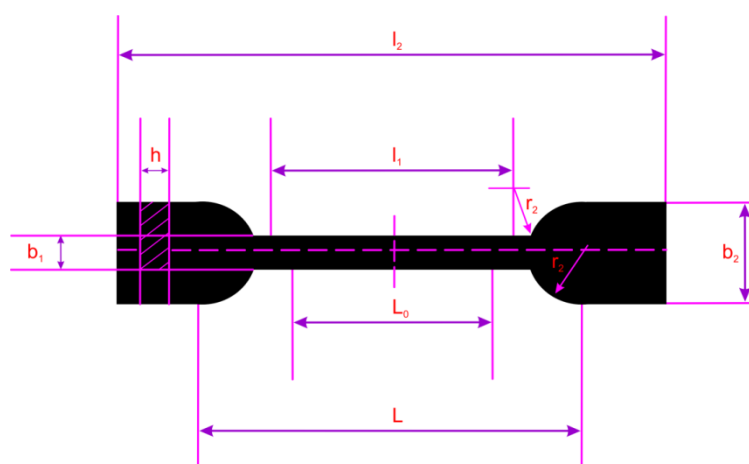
Shape of dumbbell test specimen ISO 37 Type 2
